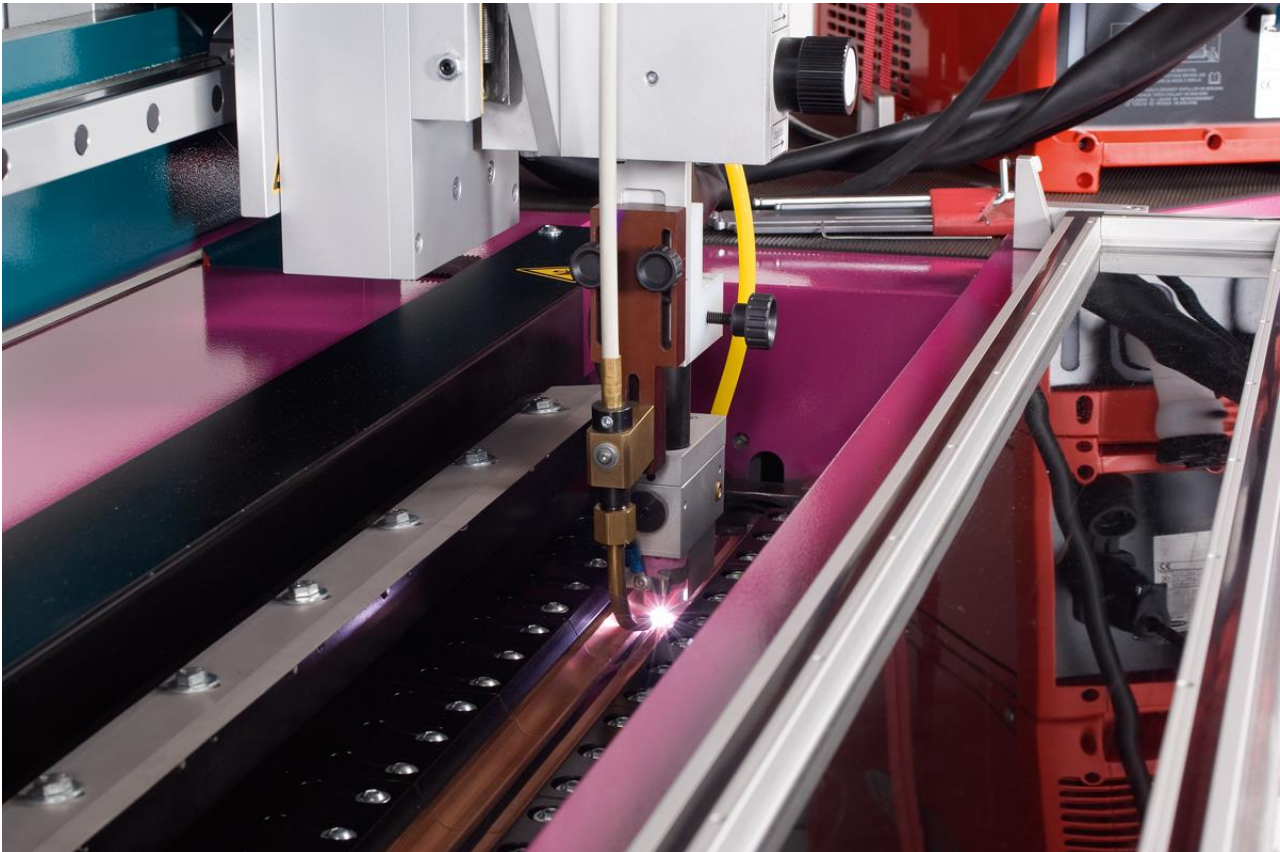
TIG welding process with additional cold wire (optional)
